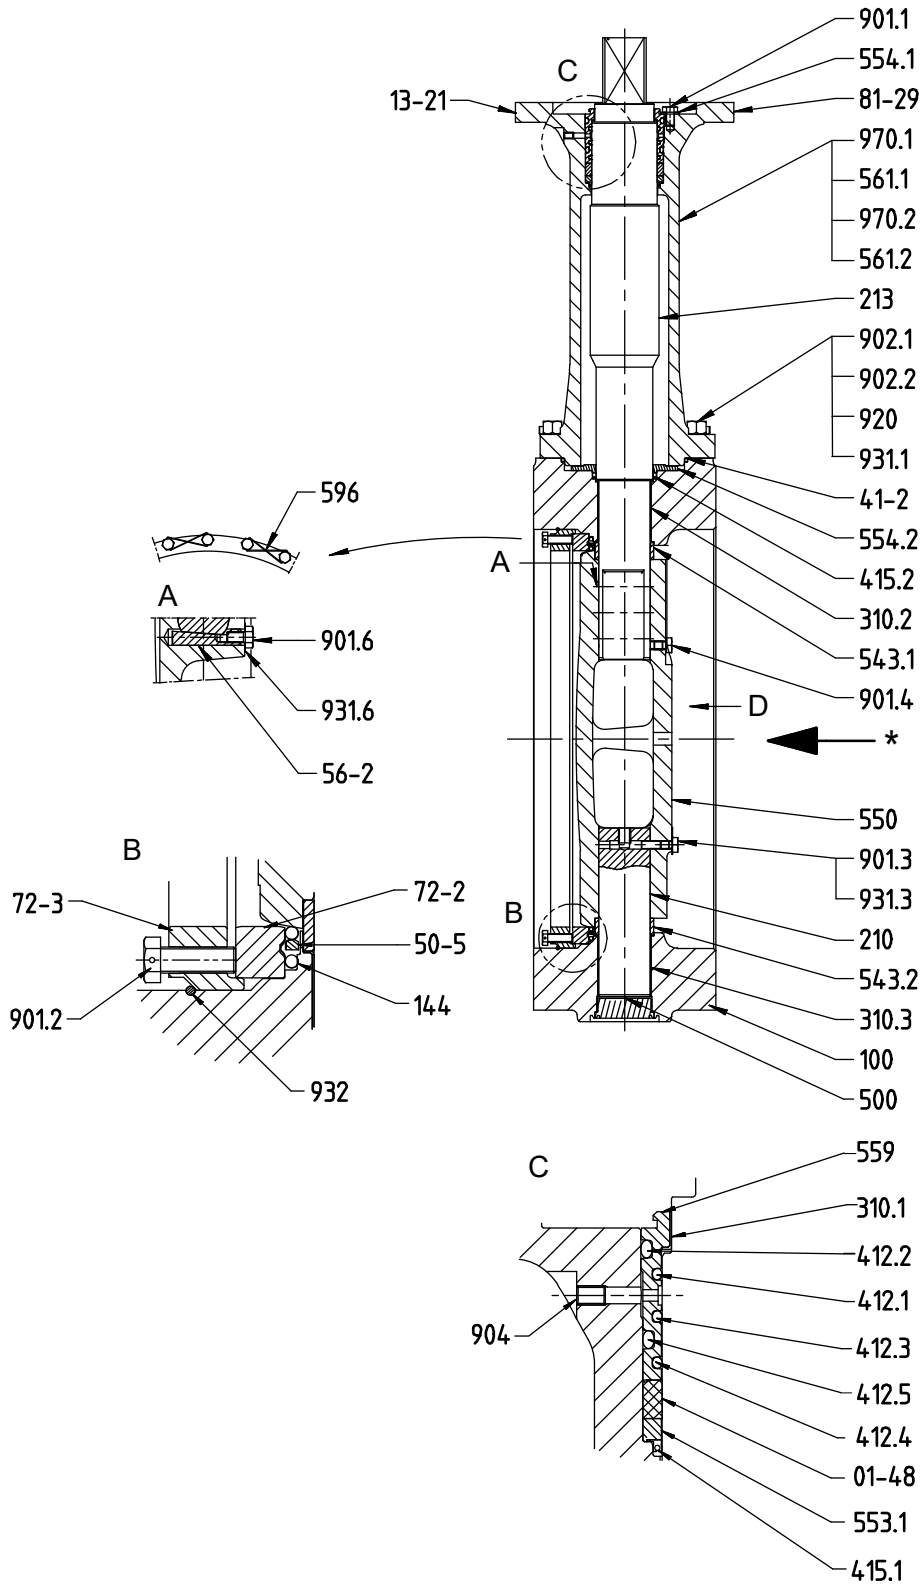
Sectional drawing of TRIODIS 150 CRYO T7 - DN 650-700 (26-28 inch)
